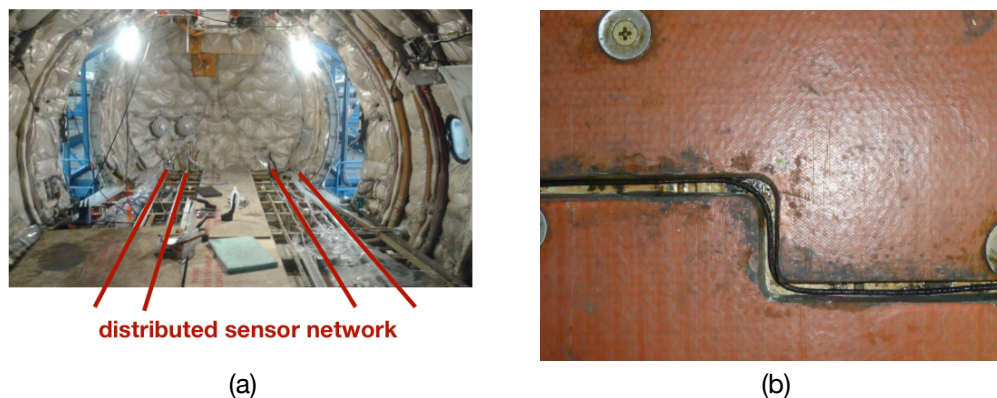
Fuselage of an Airbus 330 of Brussels Airlines in which the floor panels have been removed for inspection. Illustration of the installation of a distributed sensor network is included (R. Windey, 2016). Figure 9.1b. Detail of the floor panels of an airliner for which the sensor was installed in between (Boeing D-ABIX 737-530) (H. Pfeiffer, 2014).
